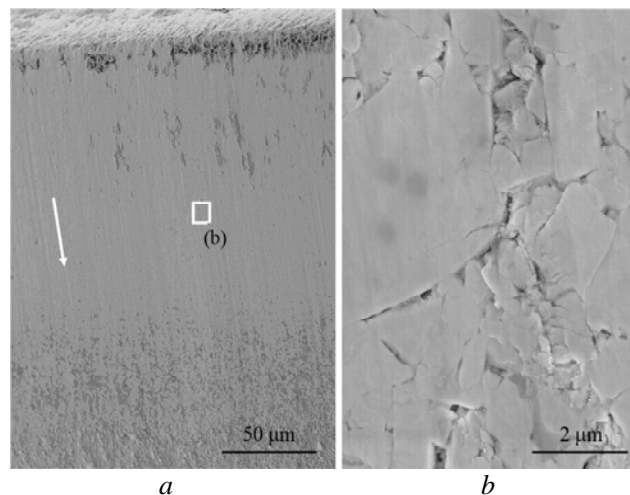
SE images after removal of adhering workpiece layer from a tool tested at the parameters of test A1: overview of flank face with wear tracks parallel to workpiece movement (indicated by arrow) (*a*); wear track at higher magnification (*b*) (location indicated in (*a*)).
